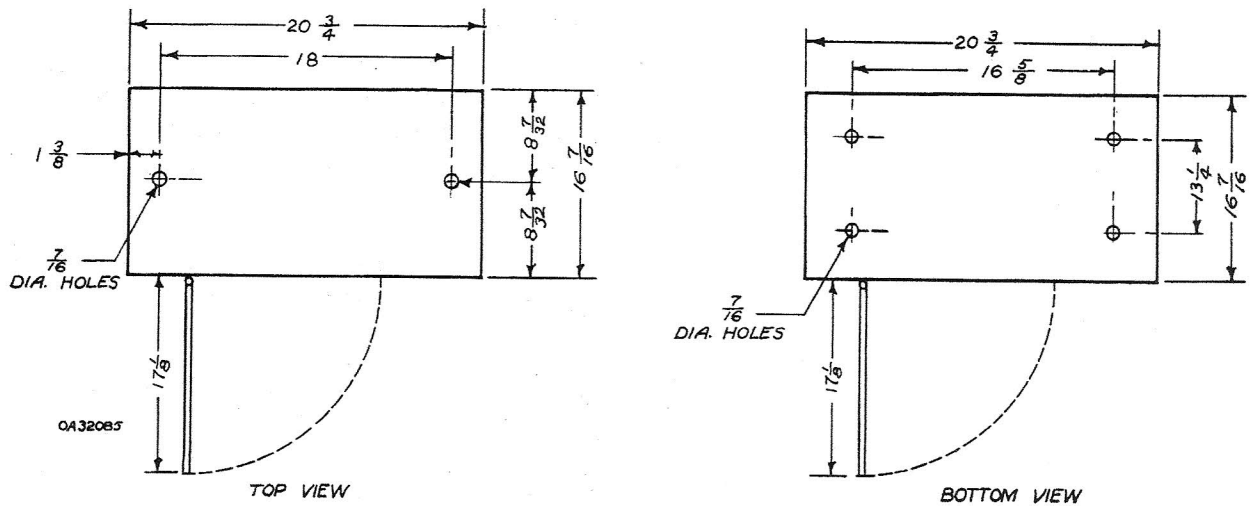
Cabinet CS-88-A, Mounting Hole Layout
